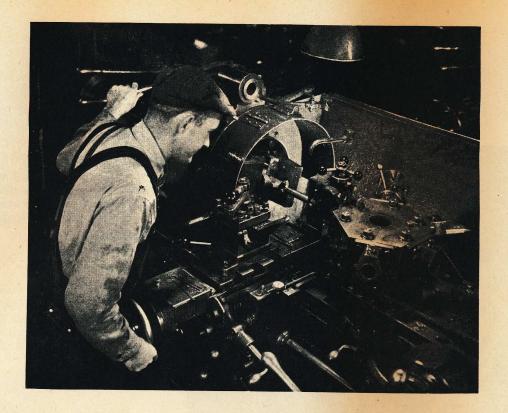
A special faceplate fixture is employed in this set-up on a No. 5 Warner & Swasey turret lathe for machining forged steel gear cases to close tolerances
